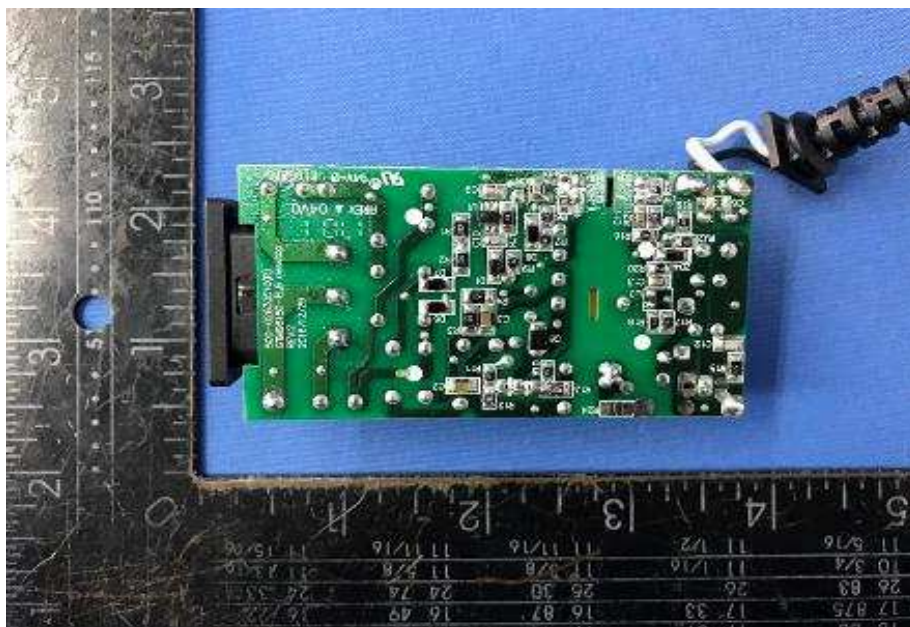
PCB view for GTM96180 series (Class I) without heatsink for D2
